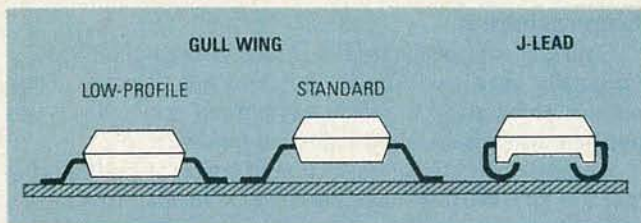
GULL-WING VS. J-LEAD SMC packages. J-lead packages can be mounted using sockets
